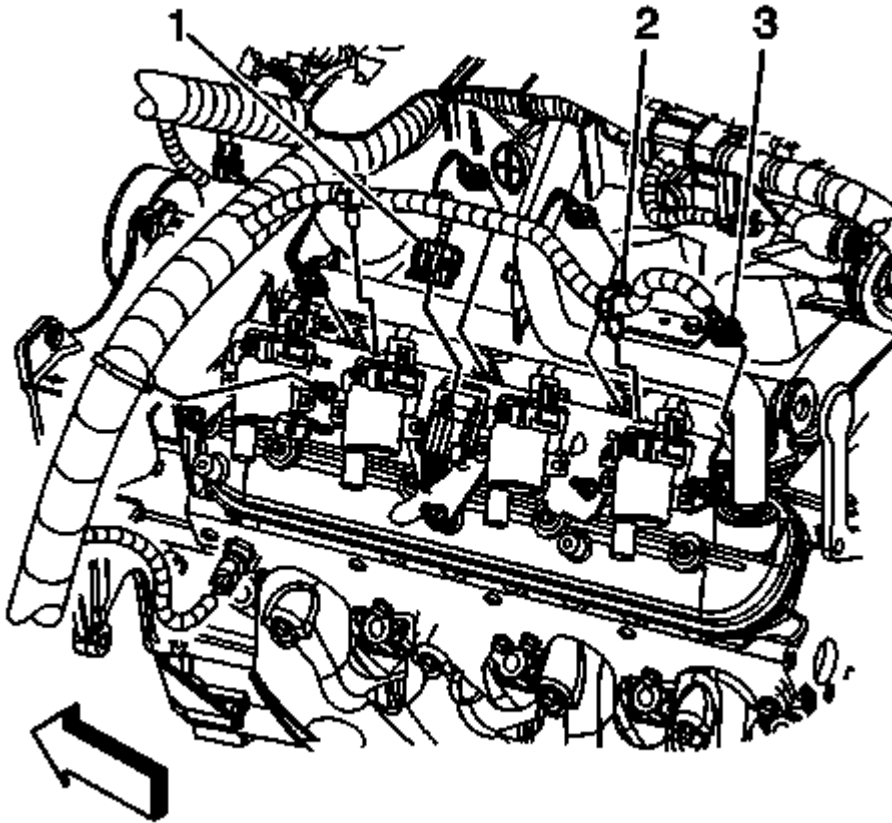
View Of Main Ignition Coil Wire Harness Connector & Clips
